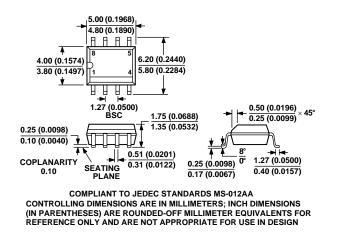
8-Lead Standard Small Outline Package [SOIC]—Narrow Body (R-8)
